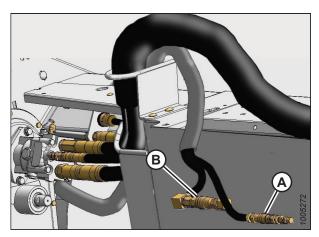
Auger Pressure and Auger/Reel Return Hose Couplers – 4.3 m and 4.9 m (14 ft. and 16 ft.) Header Shown (5.5 m [18 ft.] Header Similar)
